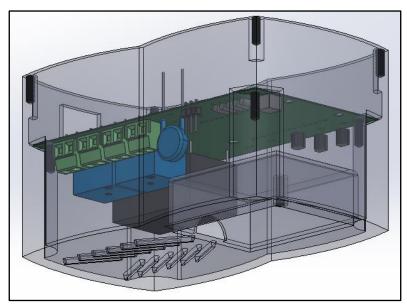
Bottom case with screw holes for PCB and PCB mounted.
